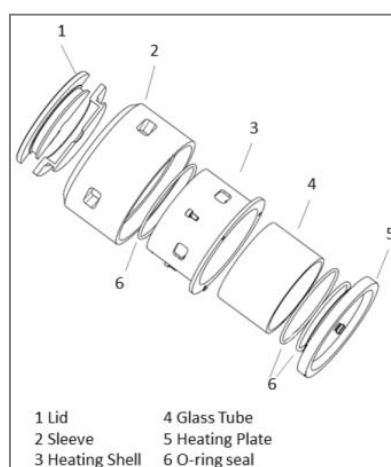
Parts and assembly of the currently marketed biconical IRS [28].
